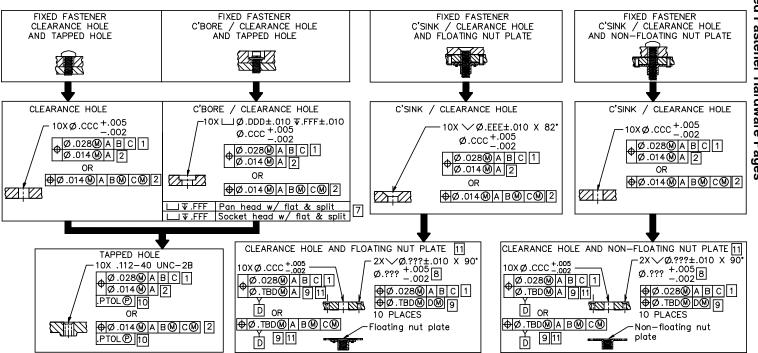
Fixed fastener tolerance and callouts
